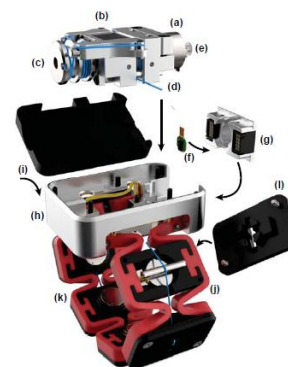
Exploded view of Tasbi (color added for clarity). The squeeze mechanism consists of a 12 mm DC motor (a) and a 13 mm Harmonic Drive gearbox (b) which drives a two-sided spool (c) to create tension in a UHMWPE cord (d). Control feedback is provided through an optical encoder consisting of a reflective code wheel (e) and optoelectronic sensor (f). The sensor is epoxied into the rear housing panel (g) which also contains two 10-pin connectors for all electronics. The drive assembly (a-e) drops into the main housing (h) and is secured in place with a housing lid (i). Each vibrotactor unit (j) contains a 10 mm LRA vibrotactor and a smooth stainless steel pin to convert cord tension into normal force. Vibrotactor units are clipped into elastic sidings (k) and secured with lids (l).
